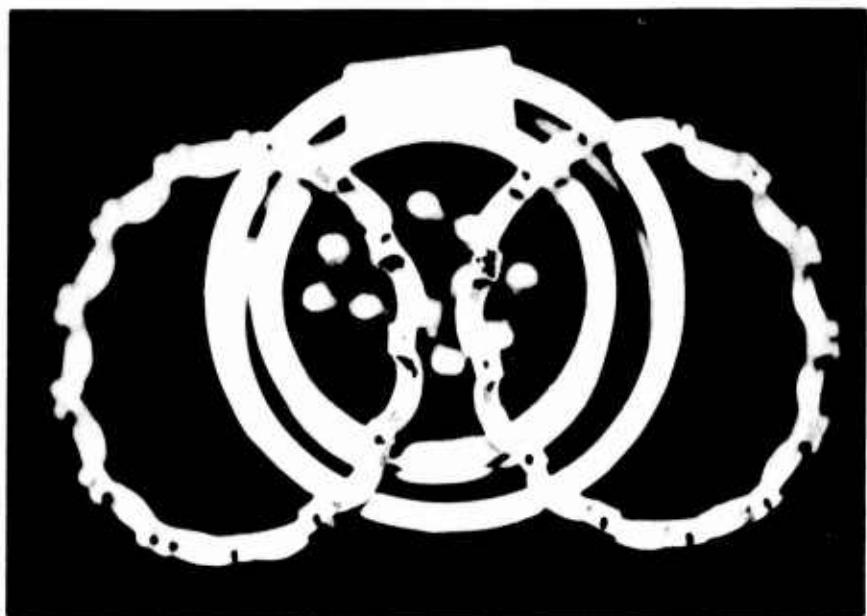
Components of Bearing S/N 31 After Test (Cage Was Broken).
